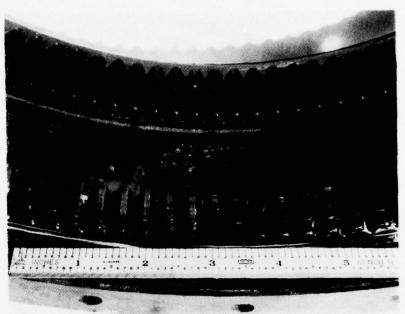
Upper ring gear (top) and lower ring gear teeth (bottom) after 54-minute loss-of-lube test of optimized transmission configuration number 2.
